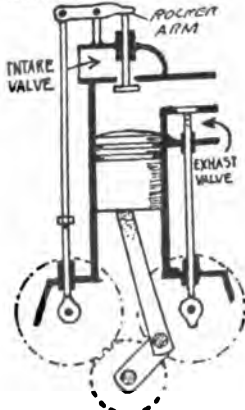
Overhead mechanically operated inlet valve and side mechanically operated exhaust valve on "F" head type of cylinder. The inlet valve in this instance would be "Cage" type (fig. 4, page 90). The cage with valve is screwed into cylinder head.
